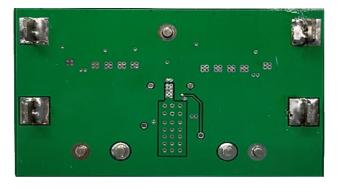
Top View of EVB, shares the same PCB with AOZ13289DI
